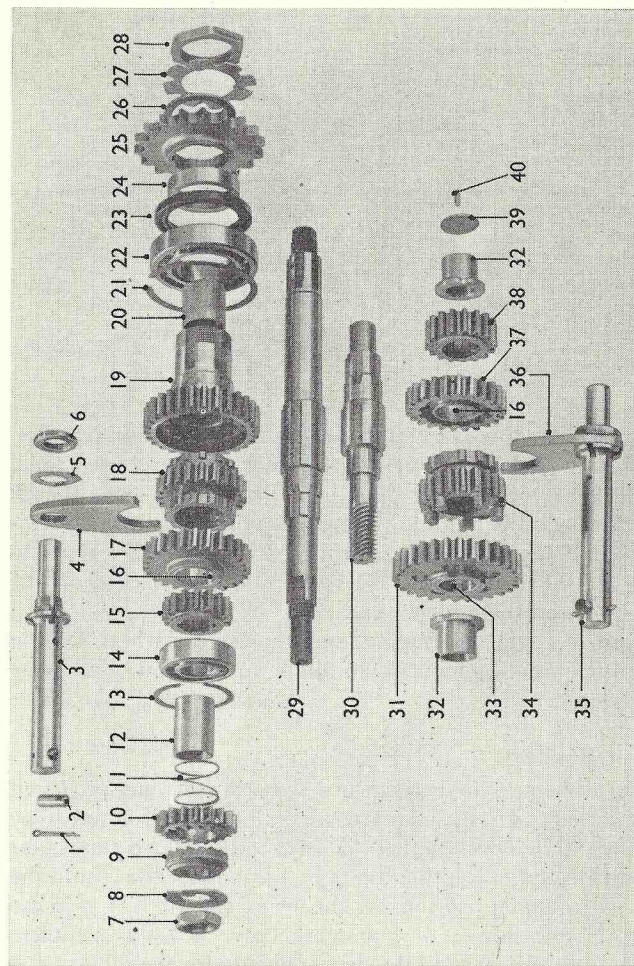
GEARBOX ASSEMBLY—LEADER AND ARROW MODELS.
